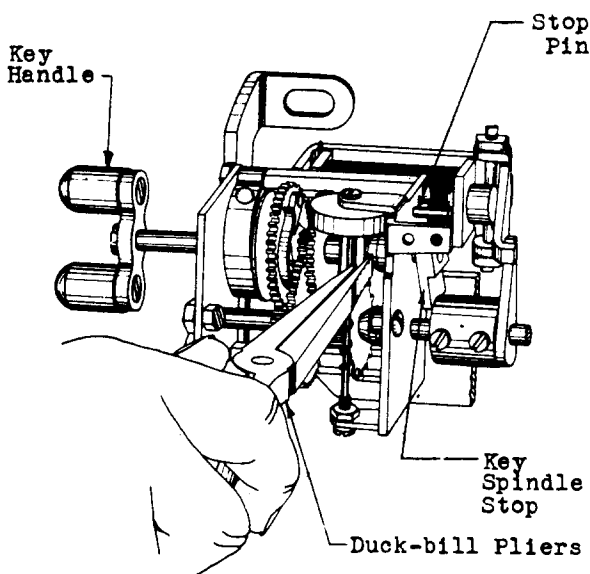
Method of Adjusting Governor Springs with Duck-bill Pliers
